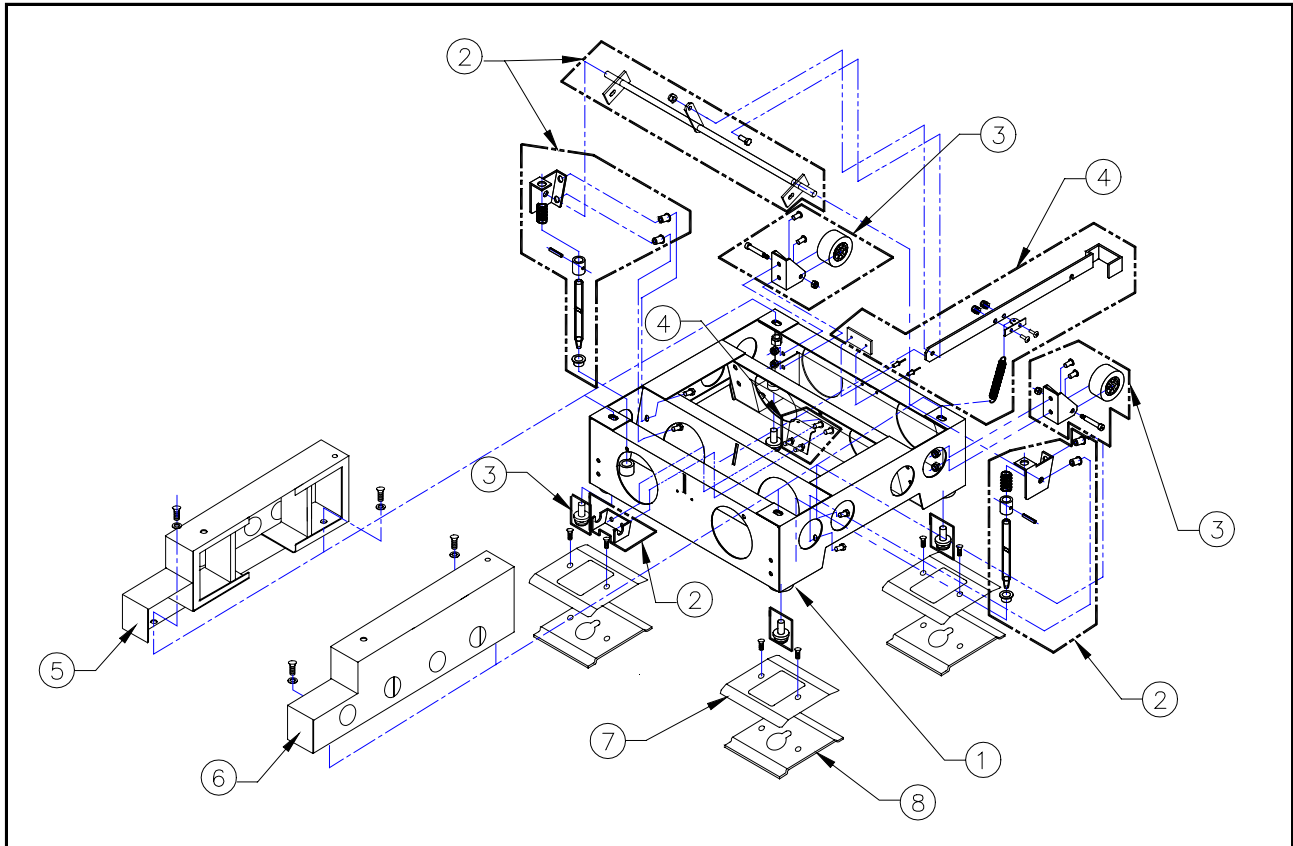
REMOVABLE FRONT SEATBASE
